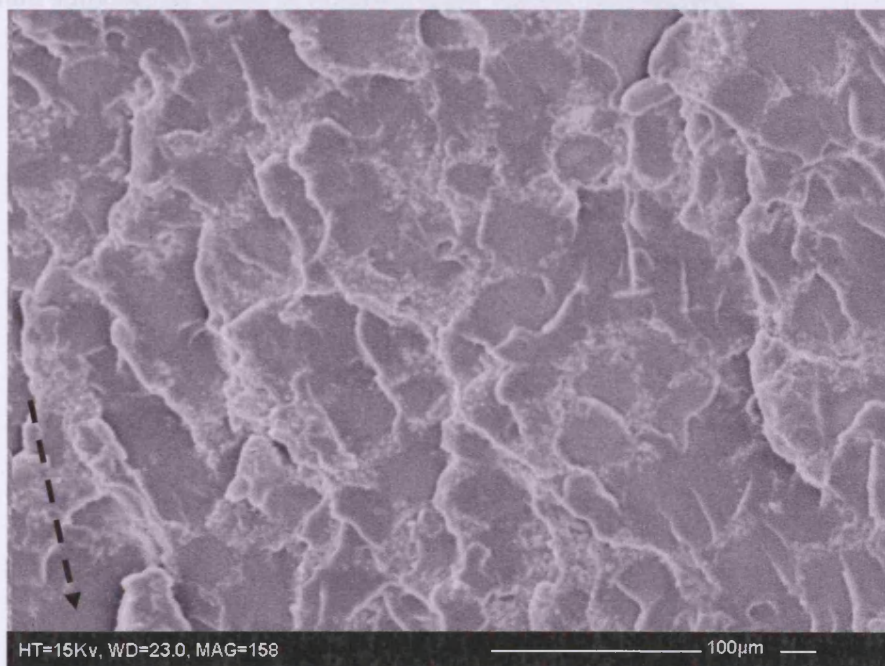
Fatigue fracture surface of CMW 1, magnification x 158
